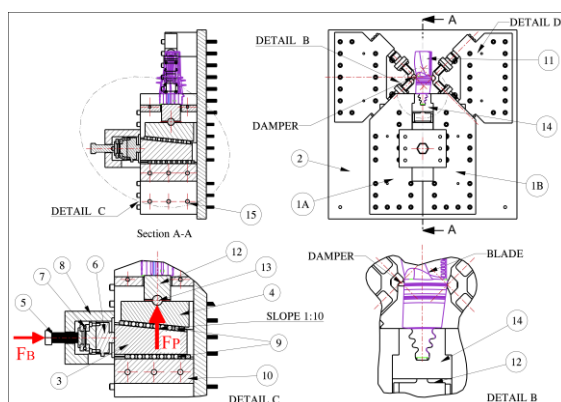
Test rig assembly details with a real turbine blade and two dampers.
